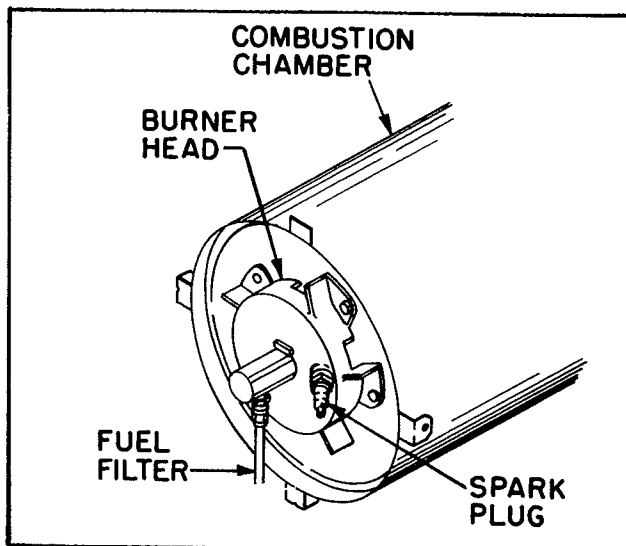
Burner Head, Spark Plug, and Fuel Filter
